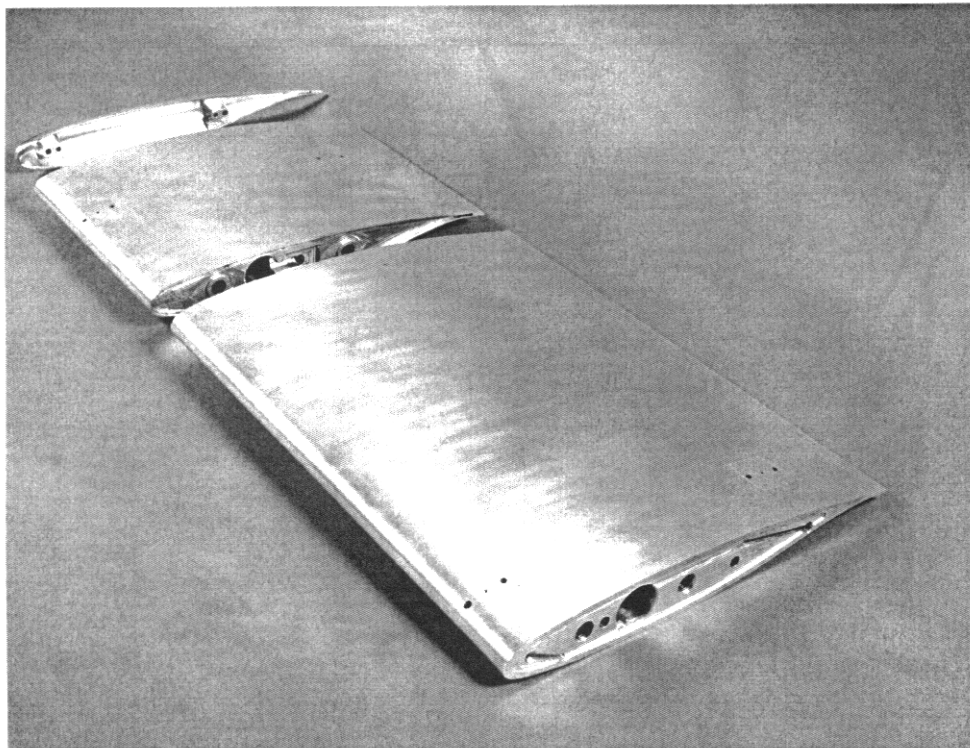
Photograph of Benchmark Supercritical Wing Model before assembly.
